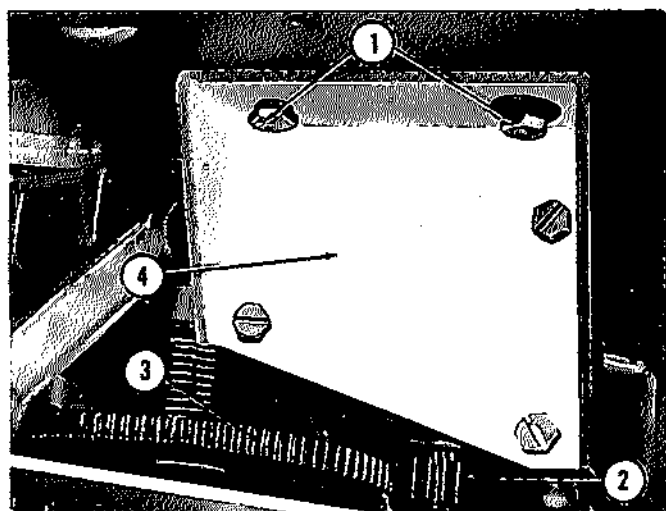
CHANGER MOTOR FINION GEAR ADJUSTMENT
